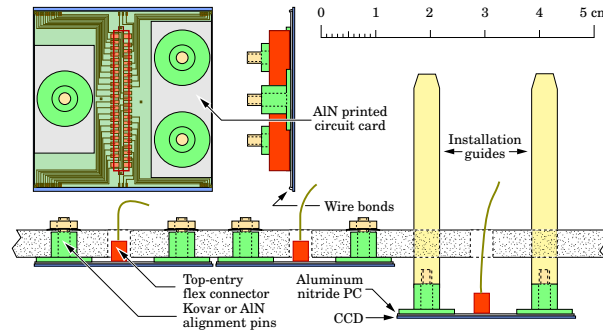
Conceptual design for “fully-depleted” CCD packaging. The CCD is cemented to a three-layer aluminum oxide substrate. The middle layer is a circuit board to which the cantilevered CCD pads are wire-bonded. Connections exit through the cold plate via a miniature connector in the center of the board. The third layer provides insulation and captures three indexing and mounting pins
